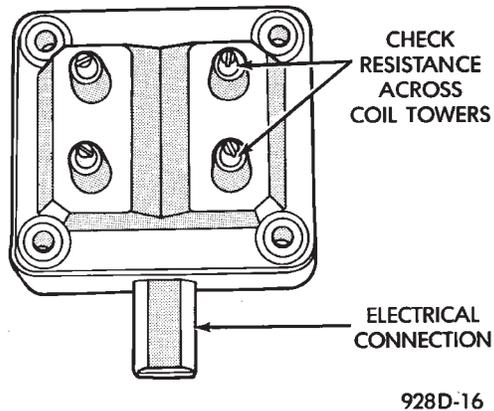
Checking Ignition Coil Secondary Resistance—Turbo III Engines
